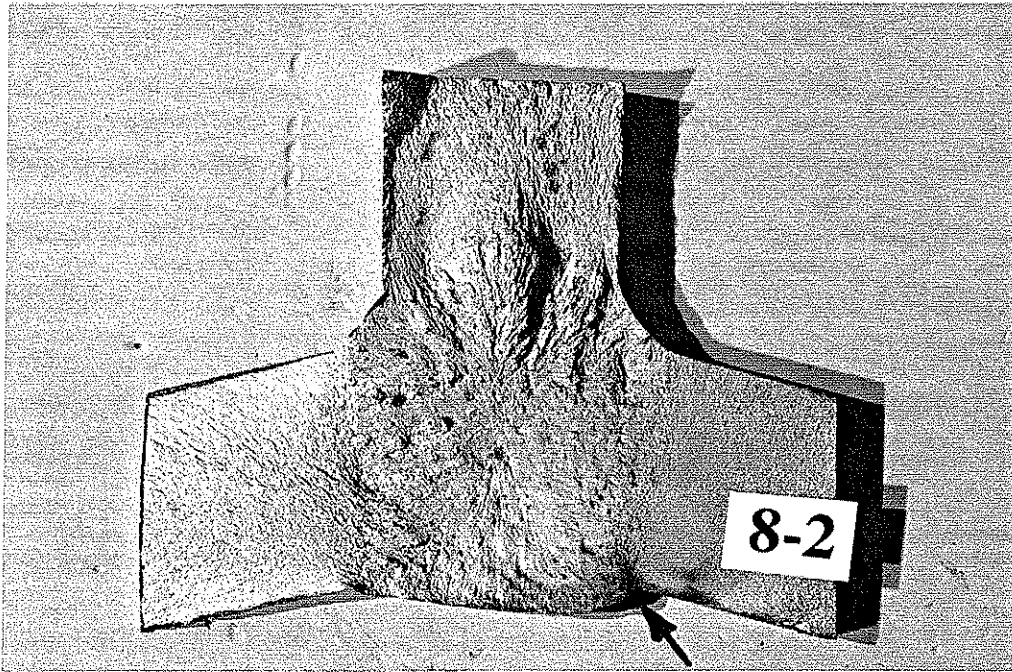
Fatigue Crack Initiation at the Weld Toe (12/93/24-2)
